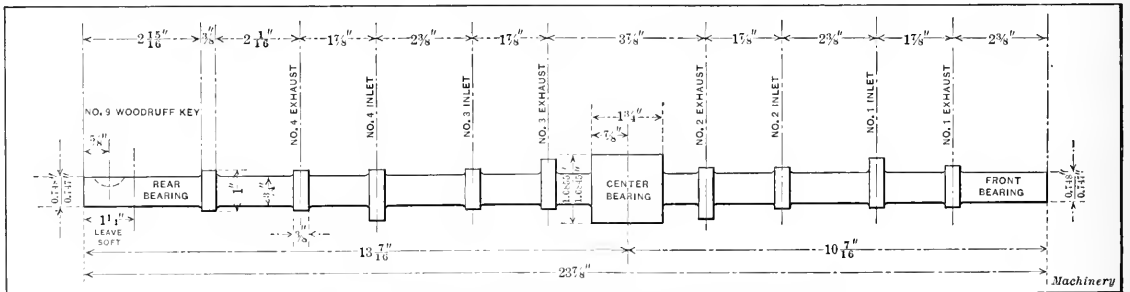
"Broadside View" of the Cam-shaft of a Four-cylinder Engine
